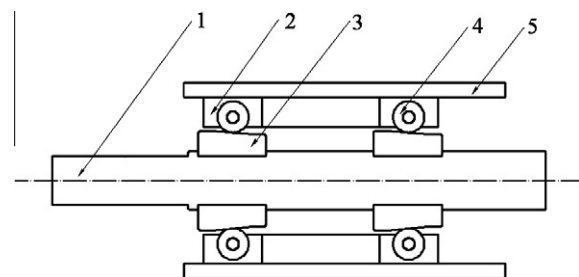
The schematic diagram on the clamp of the diameter changing 1-diameter regulating stem; 2-roller wheel spacing gutter; 3-adjusting skewback; 4-adjusting roller wheel; 5-internal stay.
